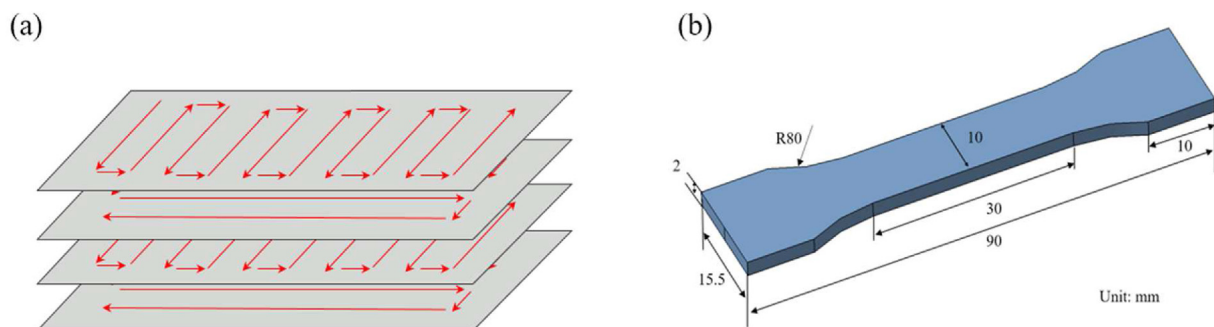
(a) 3D printing path via LMD and (b) flat dumbbell sample cut by wire electro-discharge machine.
